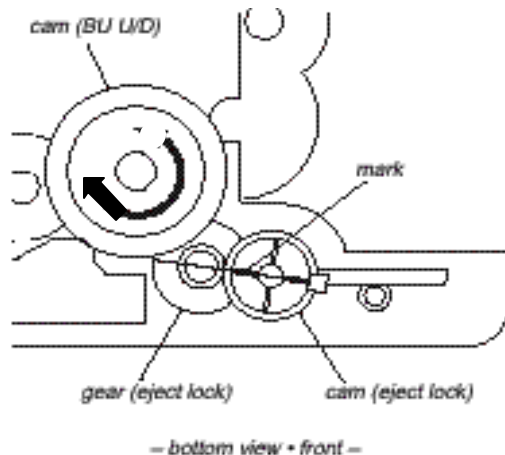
DISC ENTRY LOCKOUT CAM GEAR
